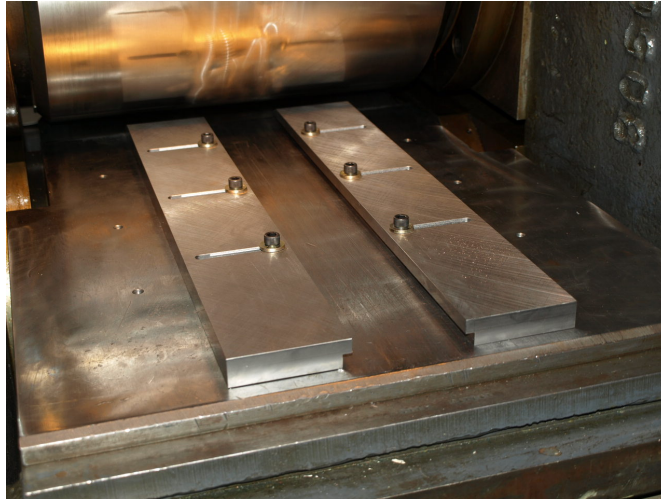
Hardened steel guides used to aid alignment of the ARB stack and reduce edge cracking.
